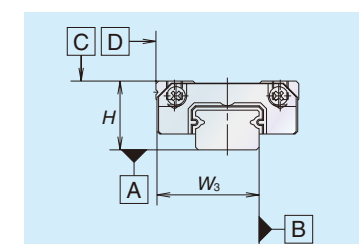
Drawing for accuracy standard (Mounting width W_3)
